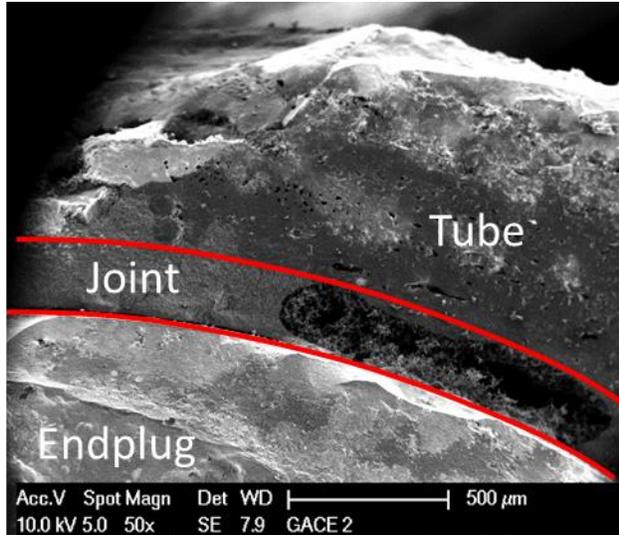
Cross-sectional SEM view of GACE 2 endplug joint showing large void
